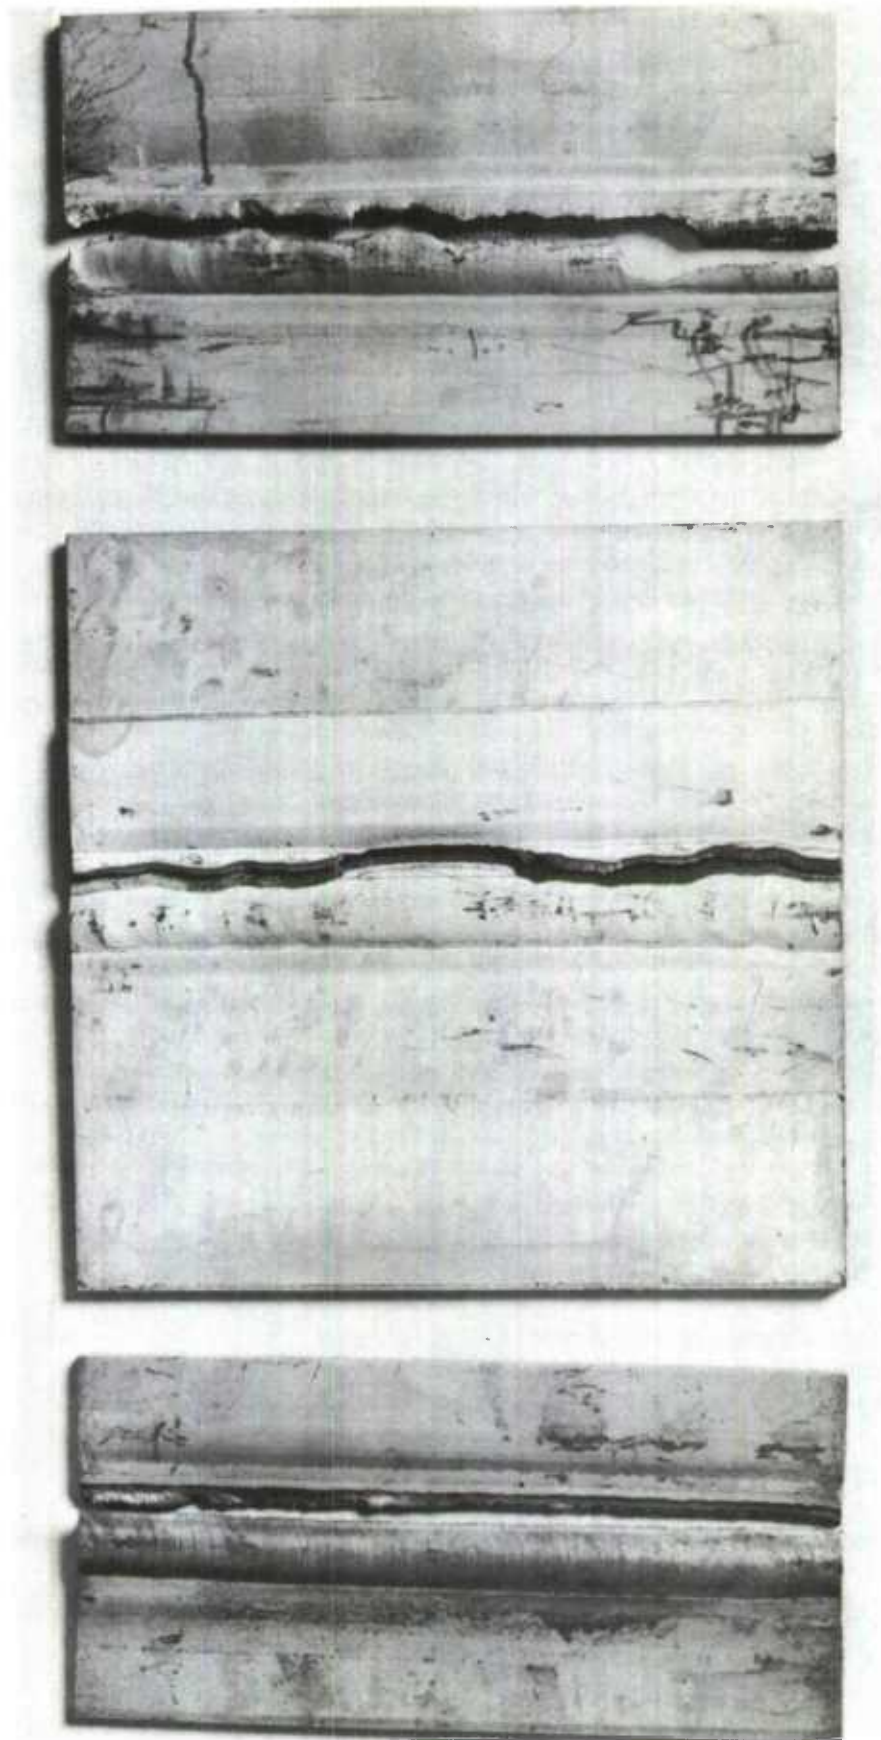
Fractured Fatigue Specimens - 2014-T6 Aluminum Alloy (78° F)
